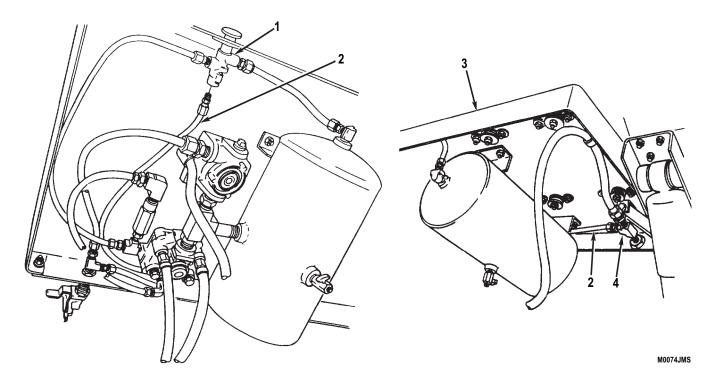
Airbrake Valve-to-Left Side Tee Tube Assembly Replacement.
